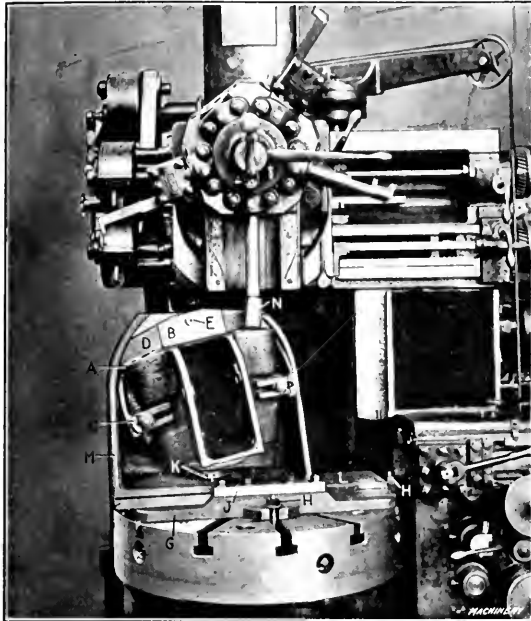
Bullard Vertical Turret Lathe arranged for machining Roller Bearing Bracket
